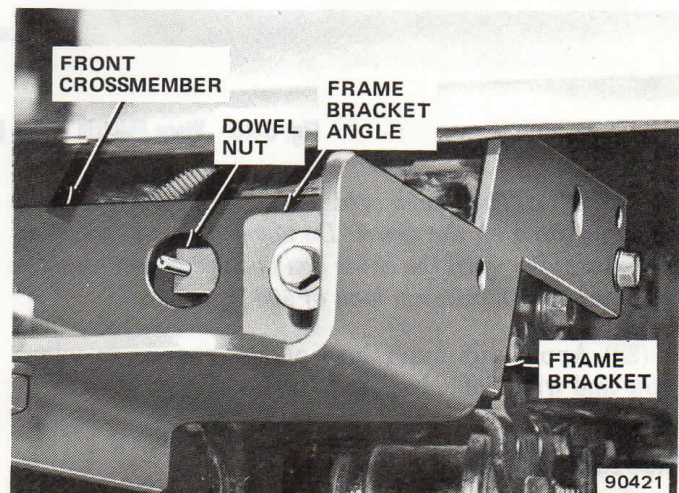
Dowel Nut Installation—1976-78 Models
